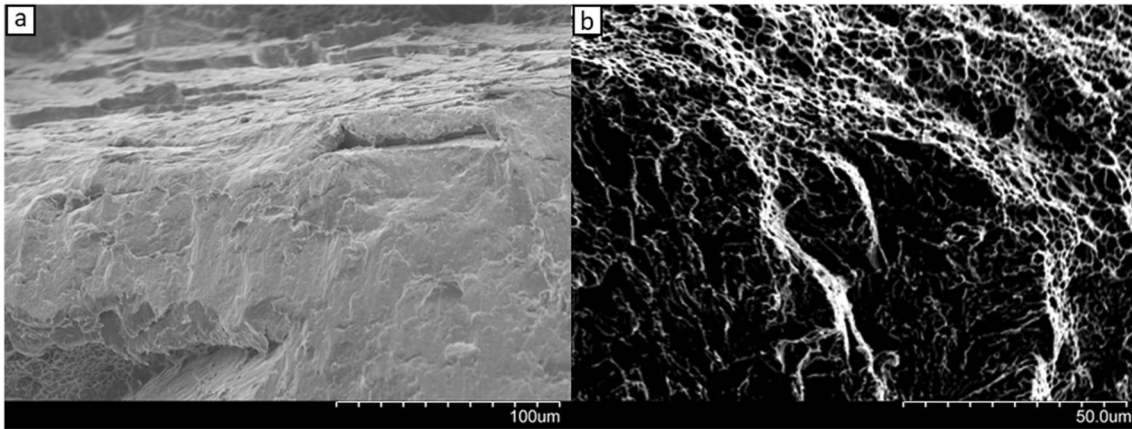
SEM imaging of the fracture surfaces of tensile samples produced by HH (a) and LH parameters (b)
